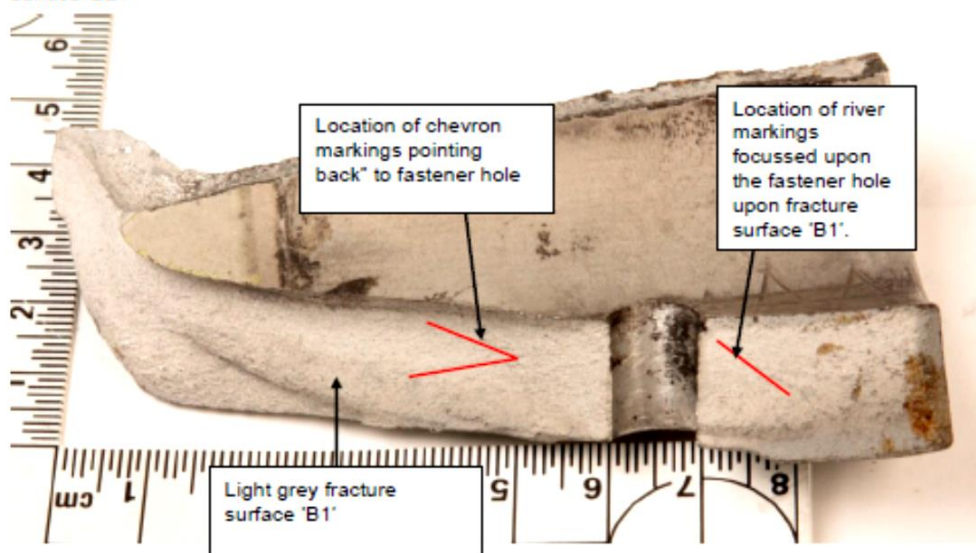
Showing the as received remnant 'B' of the undercarriage cylinder and fracture surface 'B1'.
